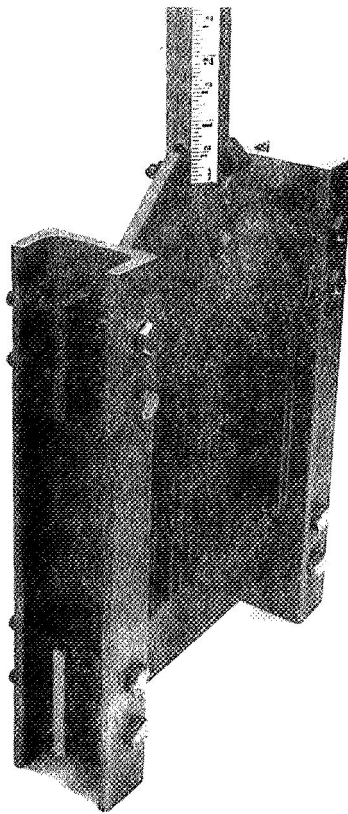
Holding fixture with group of 18 specimens (scale in inches: 1 in. = 2.54 cm).
